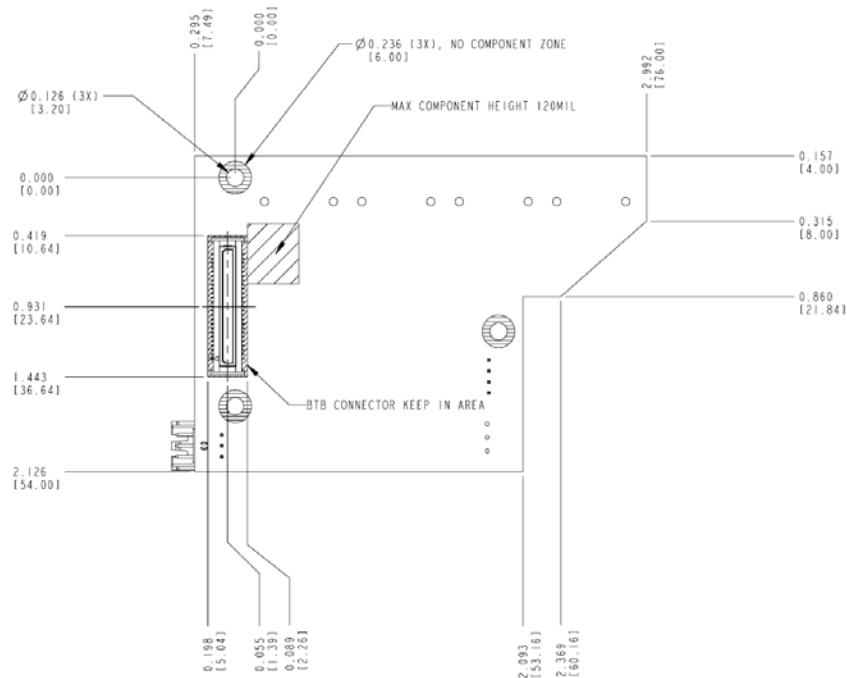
AXX4SASMOD Mechanical Dimensions (Bottom View)
